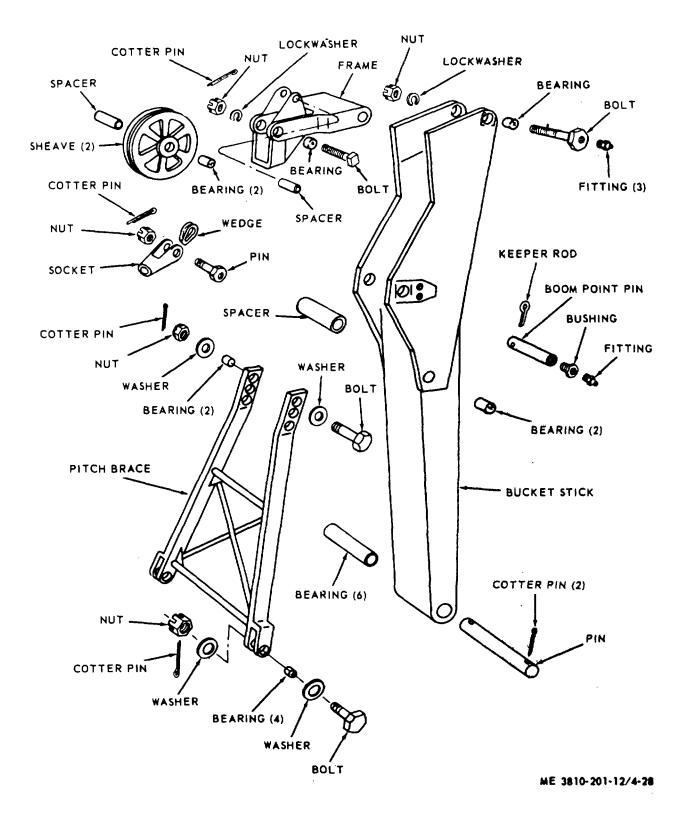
Backhoe bucket stick, disassembly and reassembly.
